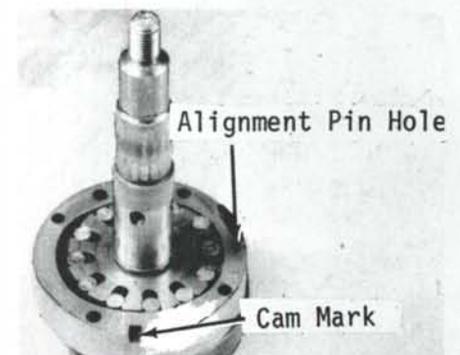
Install cam ring with cam mark towards drive end of shaft. Install alignment pin in smallest hole in cam ring.
